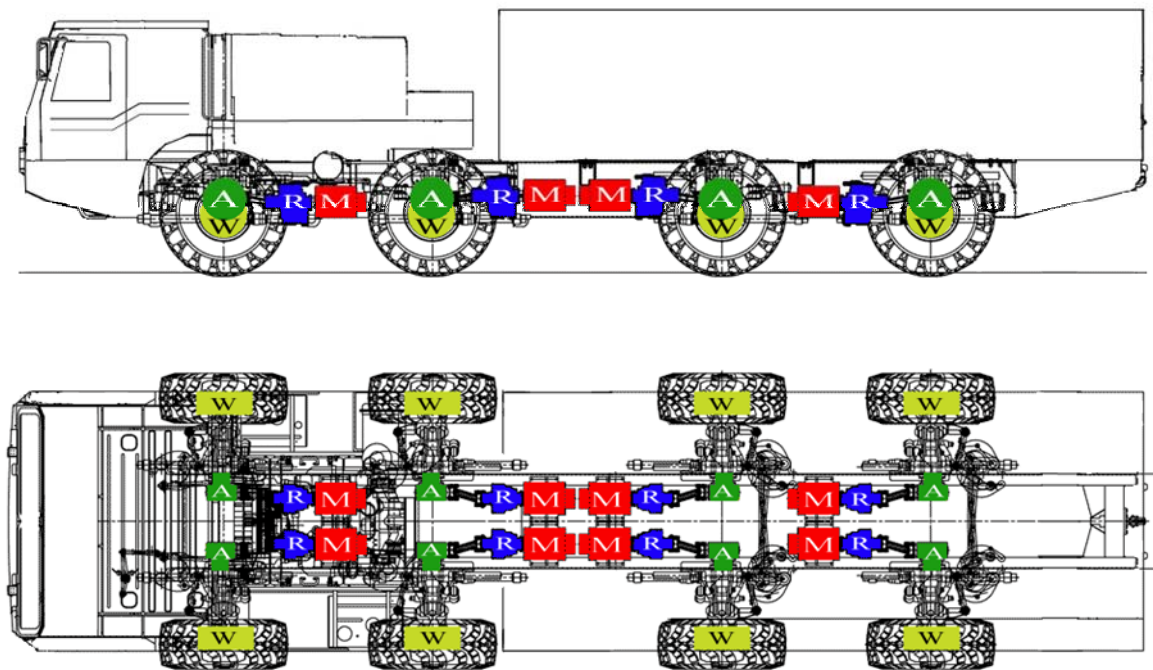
Scheme of multipurpose tetraaxial all-wheel drive hybrid vehicle.
